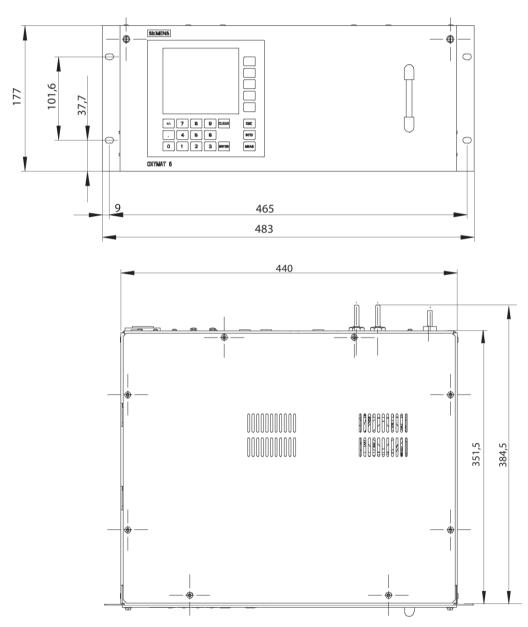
OXYMAT 6E, dimension drawing: Front view and top view
